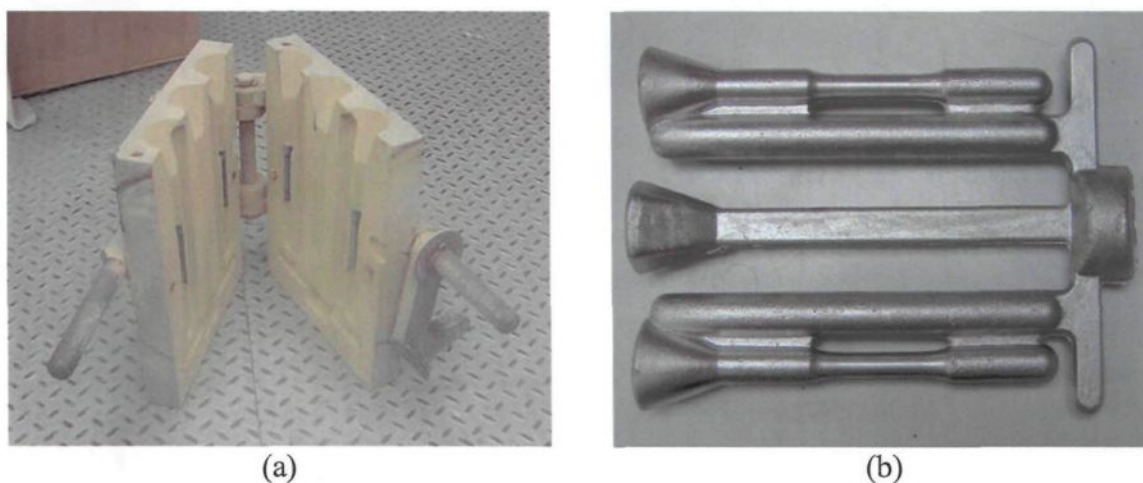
(a) Permanent mold used for preparing tensile test bars, and (b) Casting obtained from (a).
